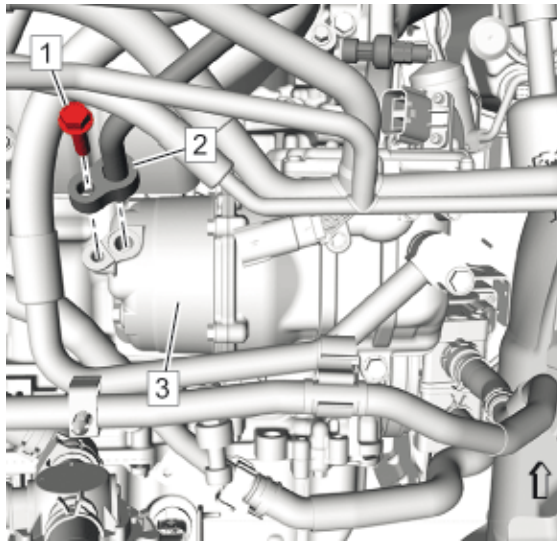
Air Conditioning Compressor, Condenser Hose And Bolt
